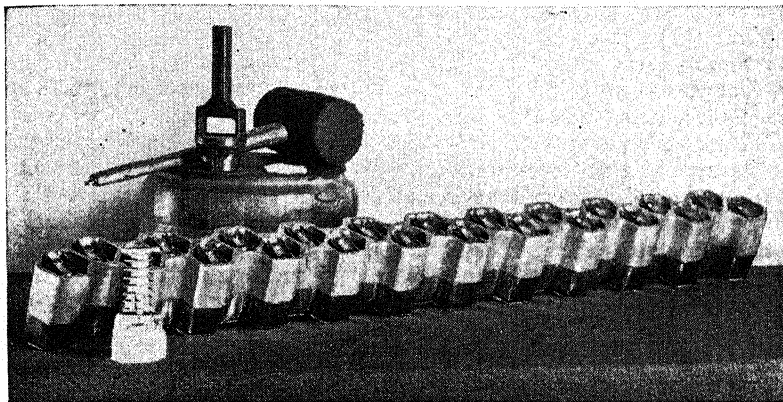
Top view of 23-tube arc welded staggered gang powder puff cutting die and single-tube hand mallet die. Expellor unit with cut puffs in foreground.
